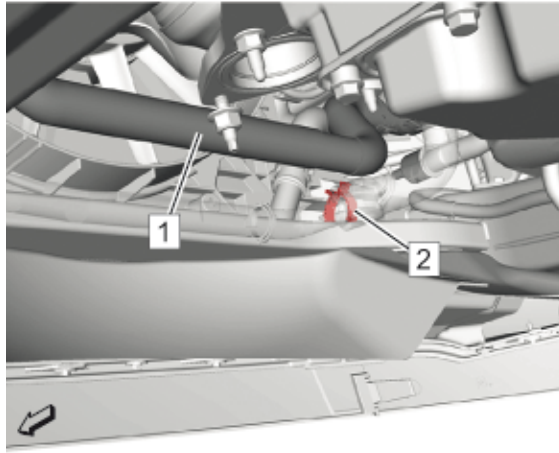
Drive Motor Battery Coolant Cooler Inlet Hose And Retainer
